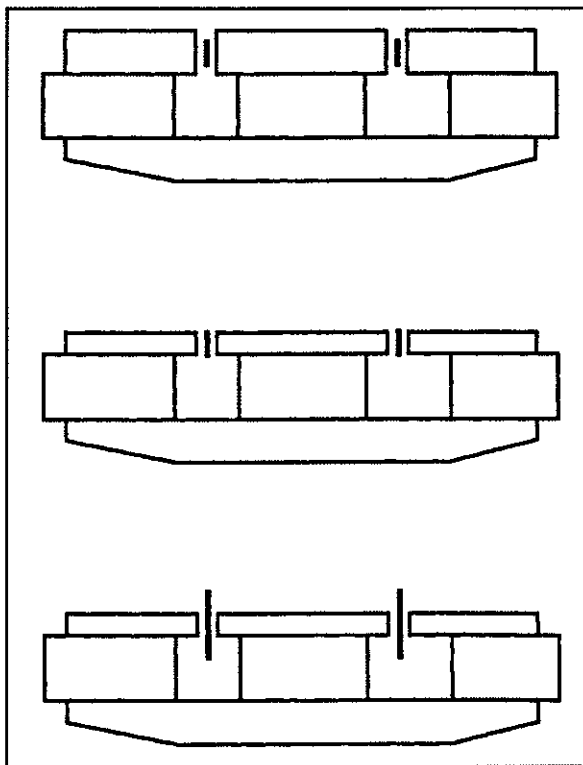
Sectional drawing of three magnetic motor assemblies: underhung (short) voice coil (top), voice coil and top plate of equal length (middle), and overhung (long) voice coil (bottom). Drawing courtesy of JBL, Inc. and John M. Eargle.
